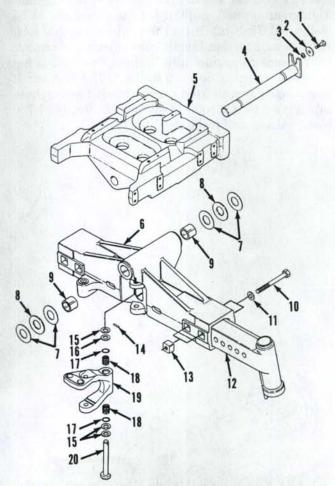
Exploded view of axle main member, front support and related parts used on all two-wheel drive tractors.
